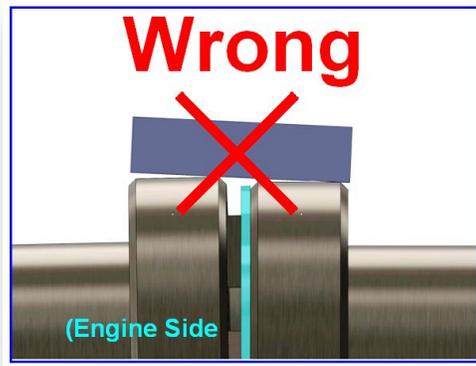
Placing the straight-edge so it makes contact with both coupling halves will result in inaccurate feeler gauge readings, as in above. Although it appears the coupling is in alignment because the straight edge makes contact with both halves, they are not parallel.
